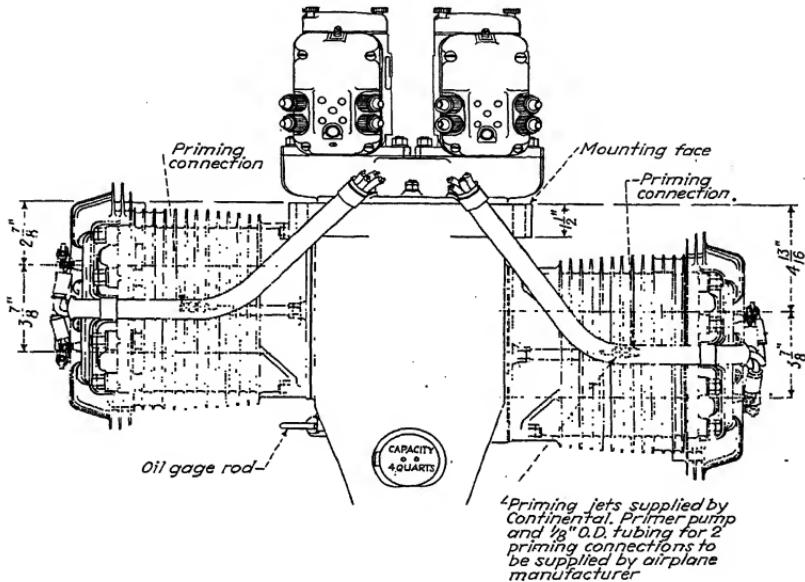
Top view of 40-hp. Continental model A40-50.
